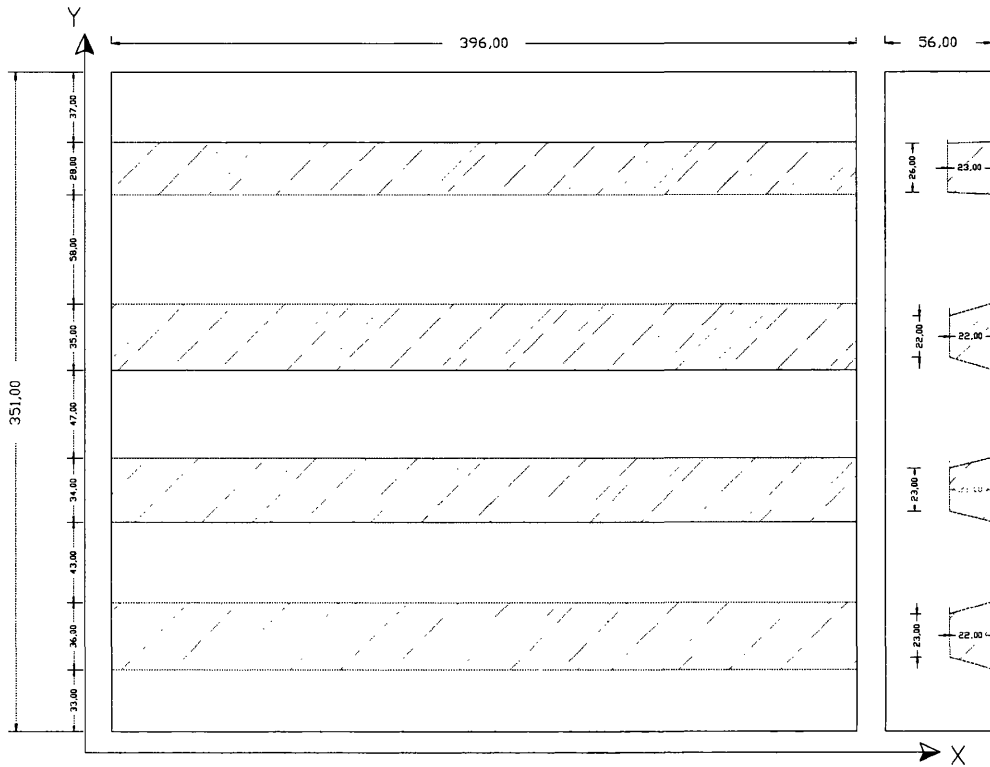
Dimension of the (2½Cr-1Mo V) block with the four weldments lines.
